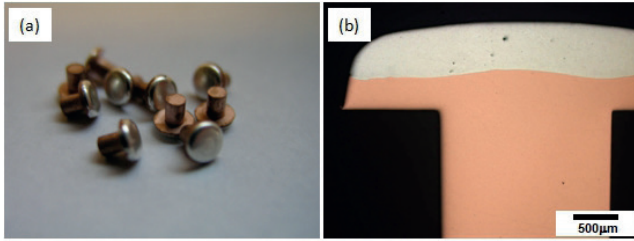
Bimetallic contact rivets AgRe10/Cu 10BW4/1x2/2.5 (10 mm – radius of a head, B – bimetallic, W – convex, 4 mm – diameter of head, 1 mm – height of head, 2 mm – diameter of leg, 2,5 mm – height of leg): (a) rivets, (b) rivet cross-section
